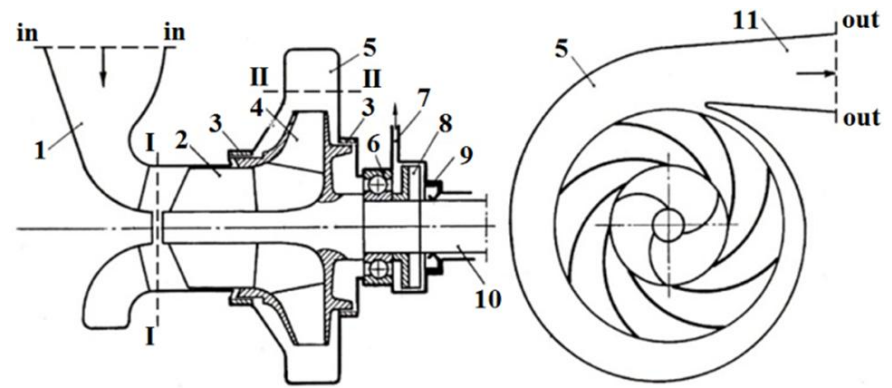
Schematic of a typical LPRE centrifugal pump: 1. Inlet, 2. Inducer, 3. Floating ring, 4. Volute, 5. Ball bearing, 7. Leakage pipe, 8. Seal disk, 9. Packing, 10. Rotor, 11. Diffuser, in: pump inlet, I-I: impeller inlet section, II-II: impeller outlet section, out: pump outlet.
